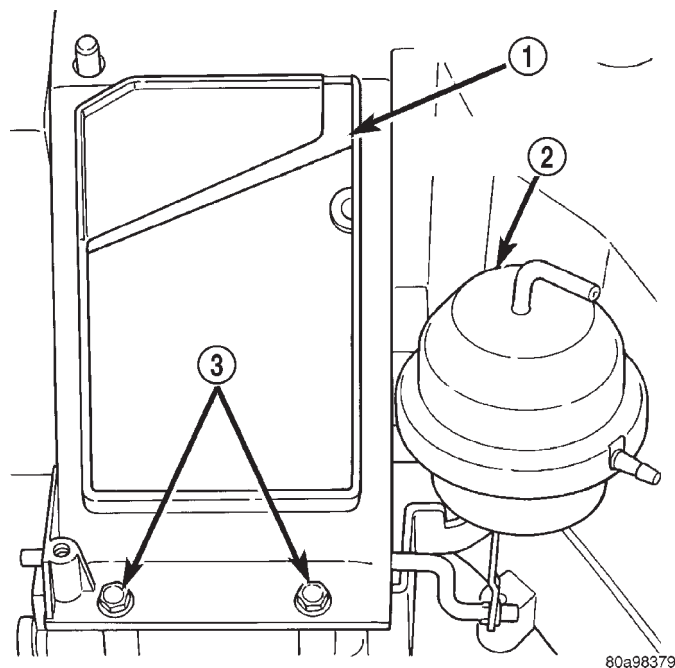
Heater-A/C Housing Floor Outlet Screws
